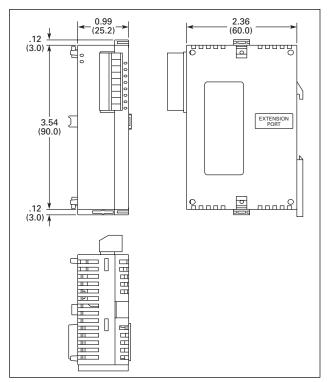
ELC Specialty Module — Approximate Dimensions in Inches (mm)
